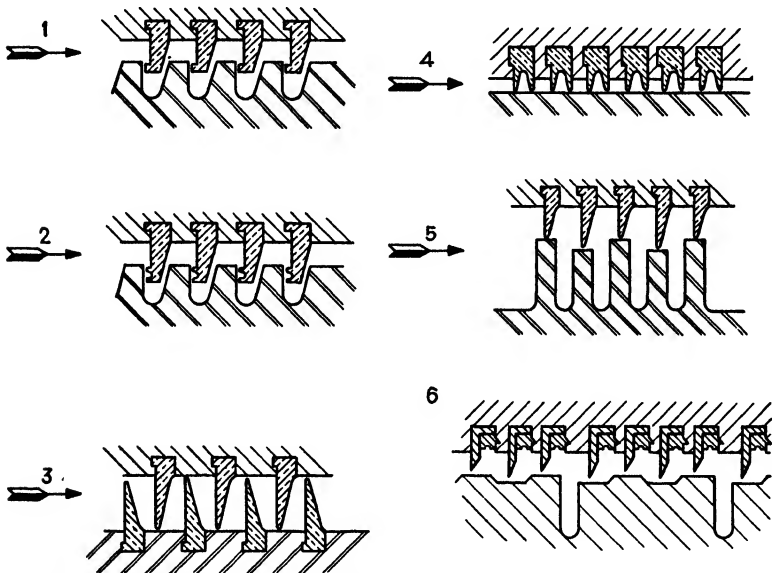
Types of dummy sealing strips developed by Westinghouse Electric & Manufacturing Company. (From *The Log*, August, 1939.)
